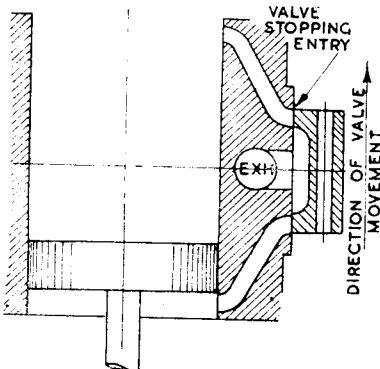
Cut-off. No steam entering or leaving top or bottom side of piston
